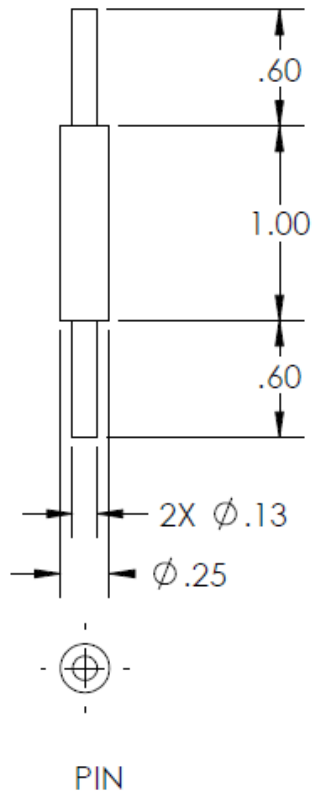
Orthographic Projection of Pin in the Pulley Assembly
